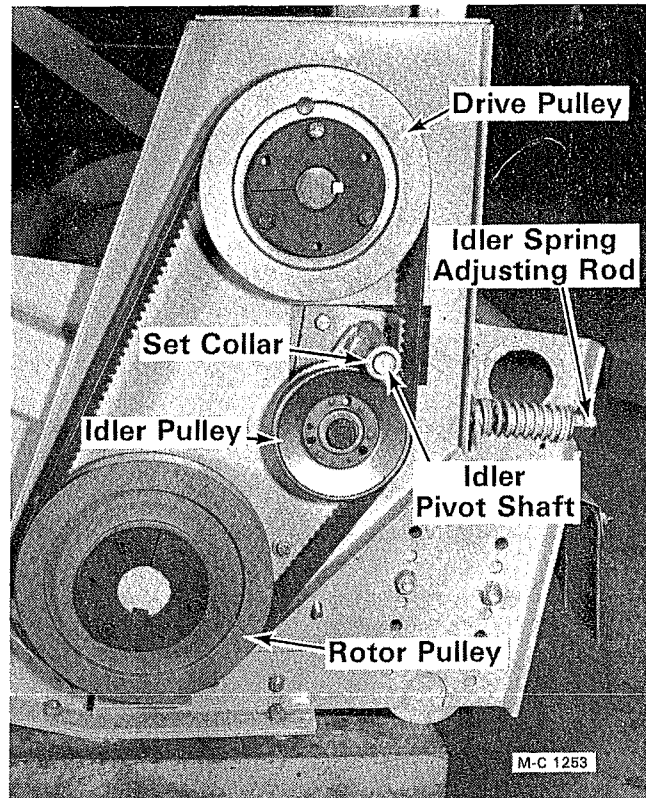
TC Model Shown. On FM Models Rotor and Drive Pulleys Are Interchanged.
